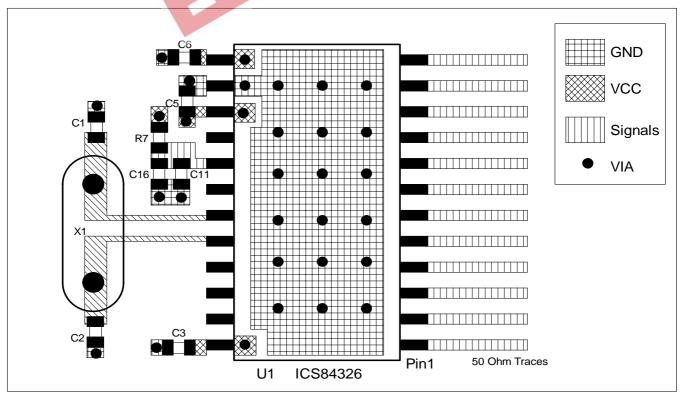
B. ICS84326 P.C. BOARD LAYOUT EXAMPLE
